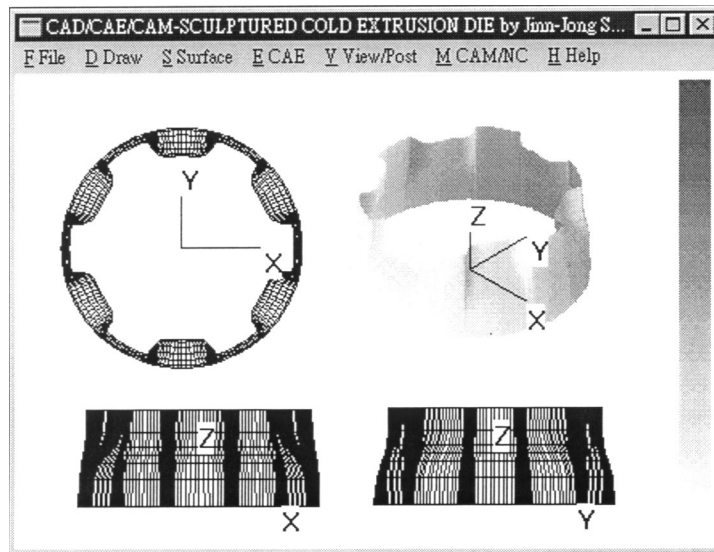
The optimum die surface for the hollow extrusion of gear spline.
